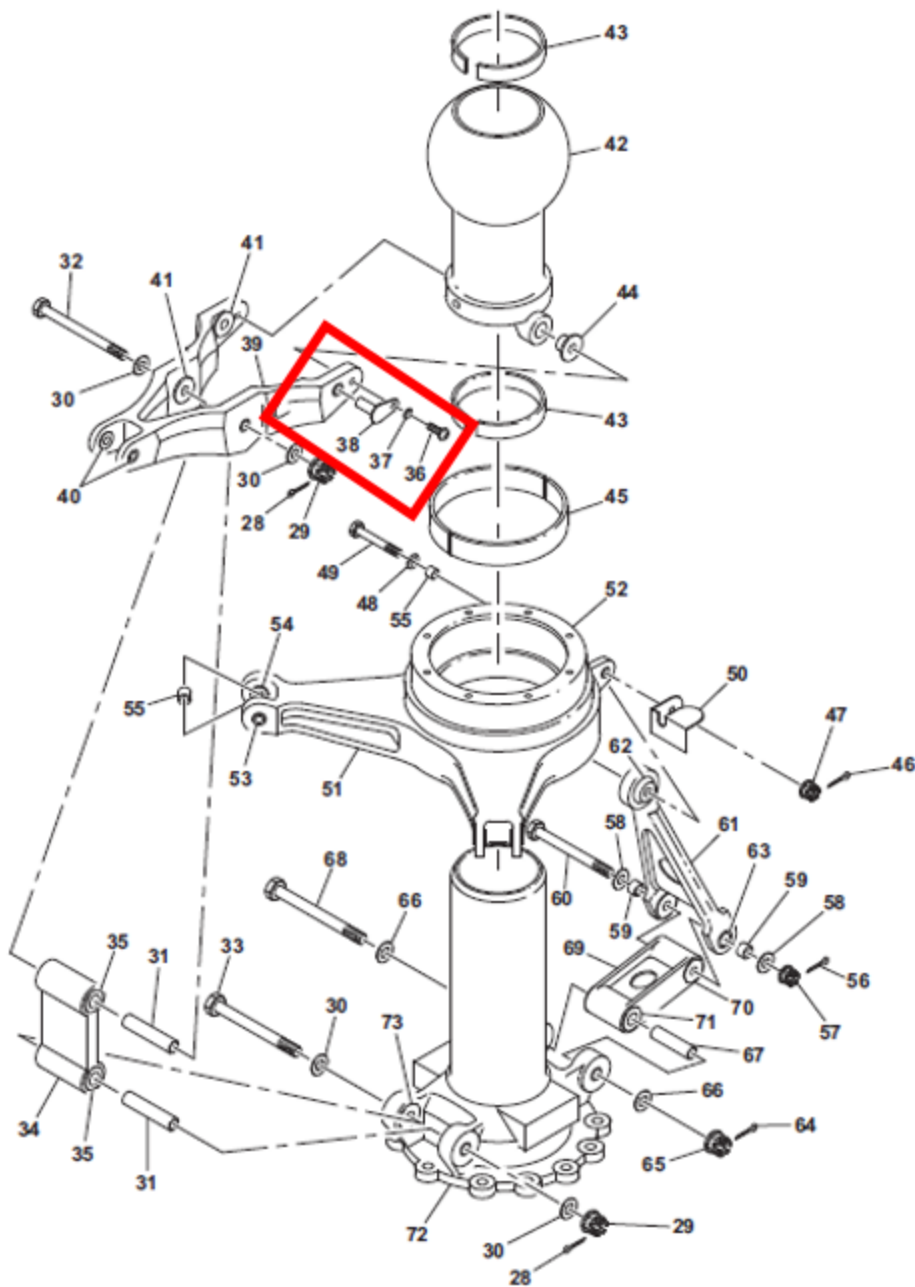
Swashplate support assembly, with collective pitch lever attaching hardware outlined in red.
